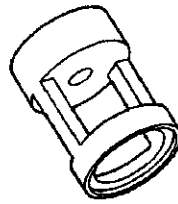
Valve Spring Compressor Adapter Tool 6716A
